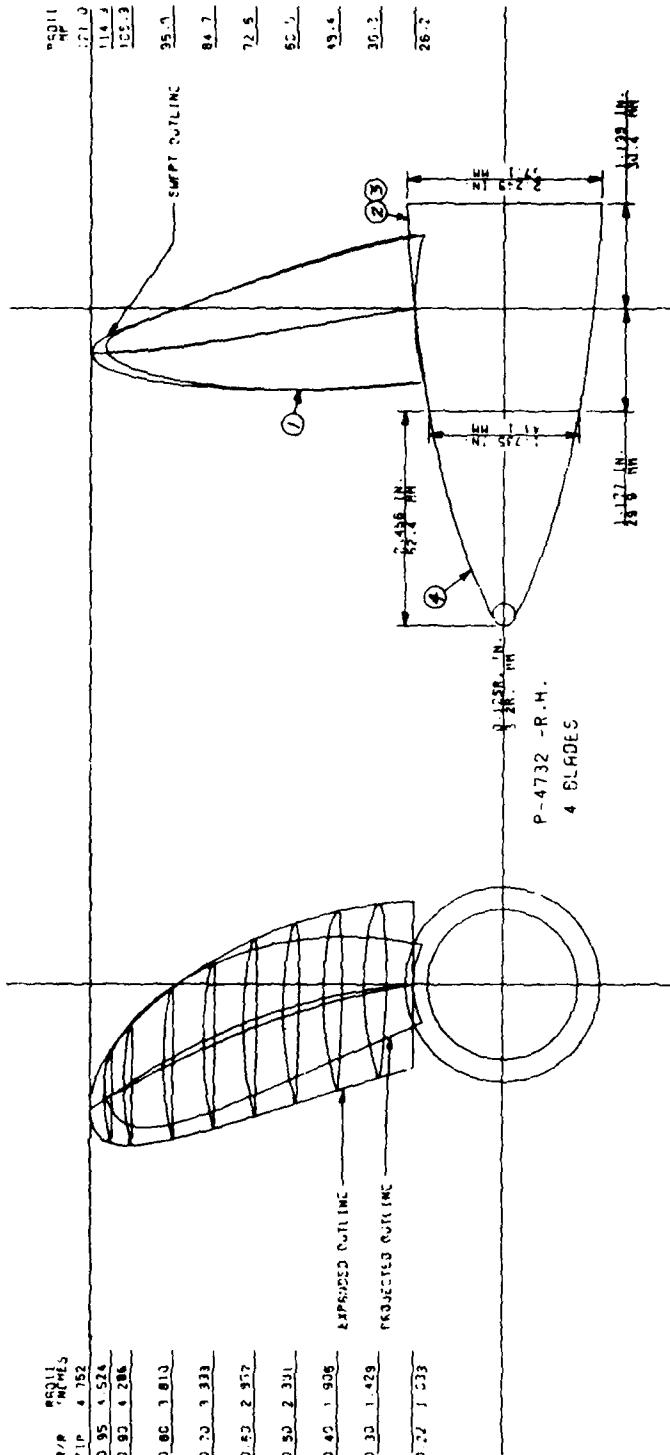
Drawing of Propeller 4732 (DTHSRDC Aft)
